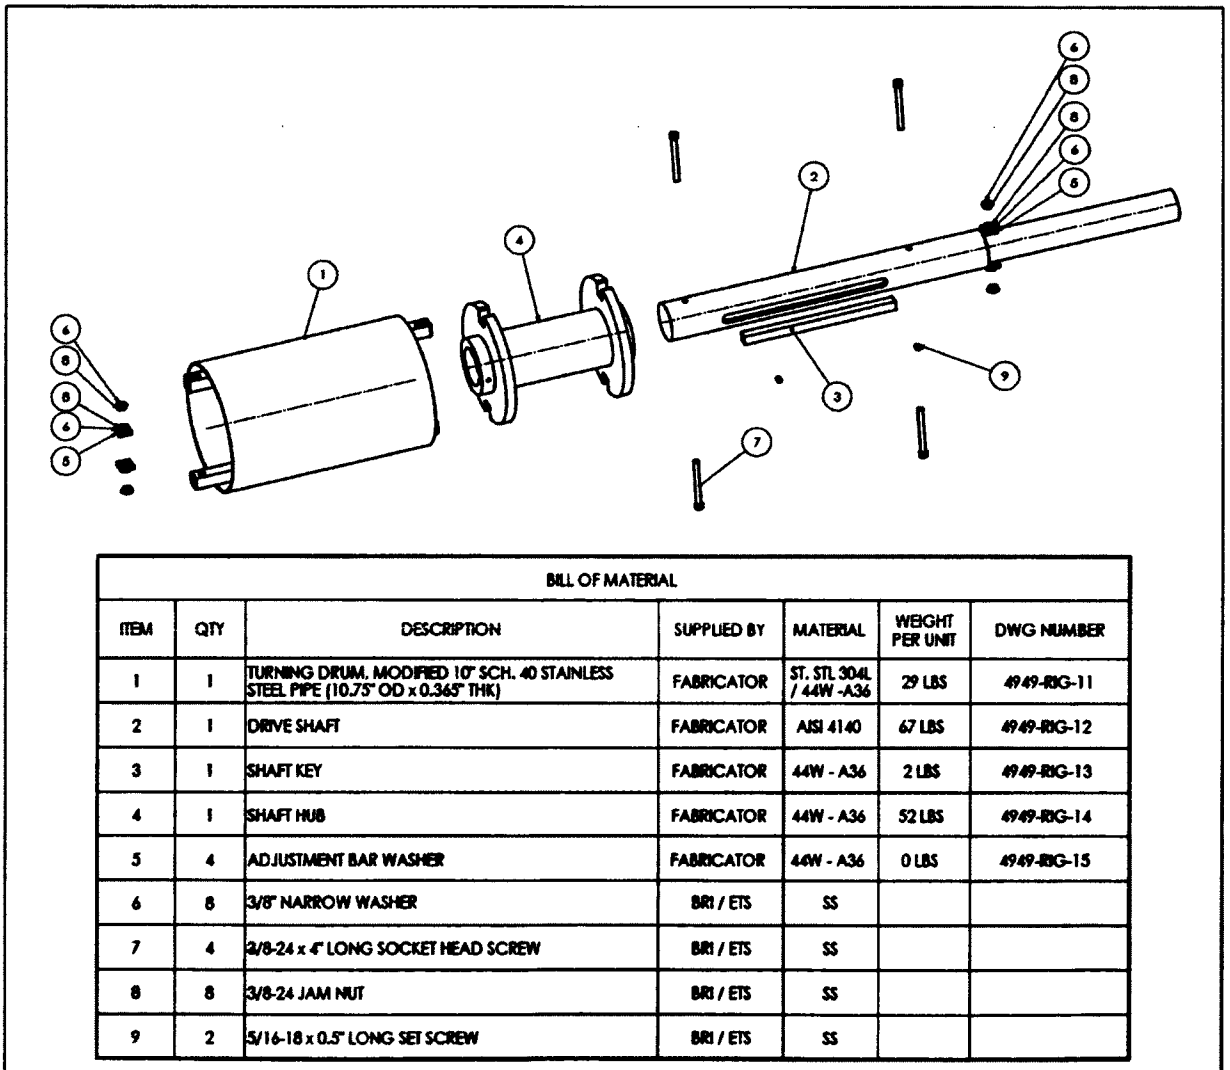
Deformable Drum Mechanism, Exploded View.
